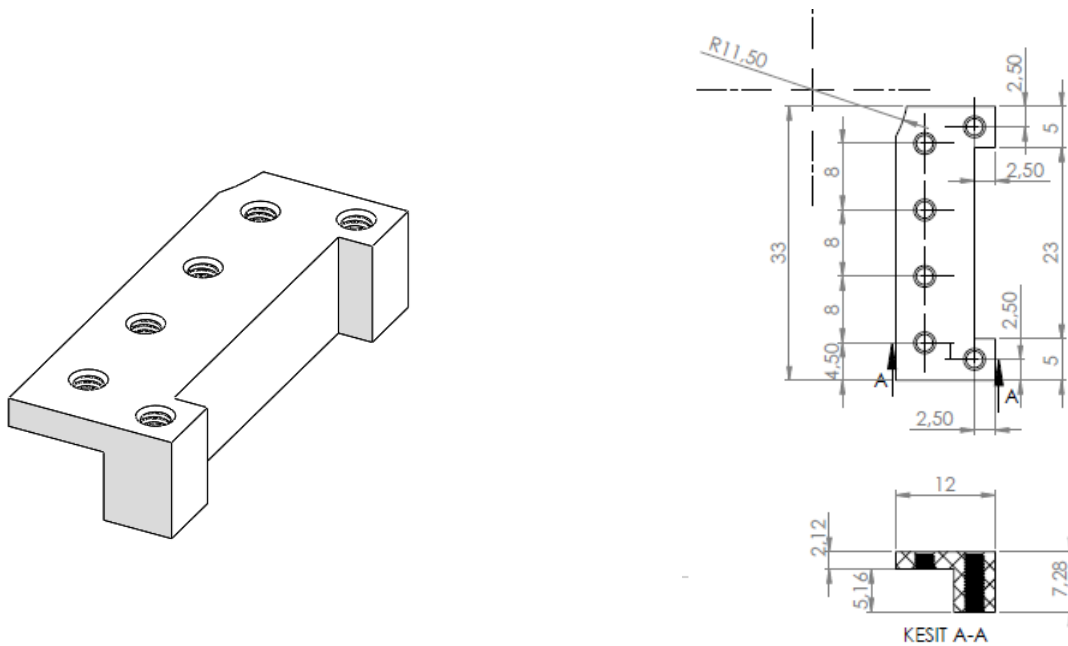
Technical Drawing and Trimetric Views of the Connecting Holder
